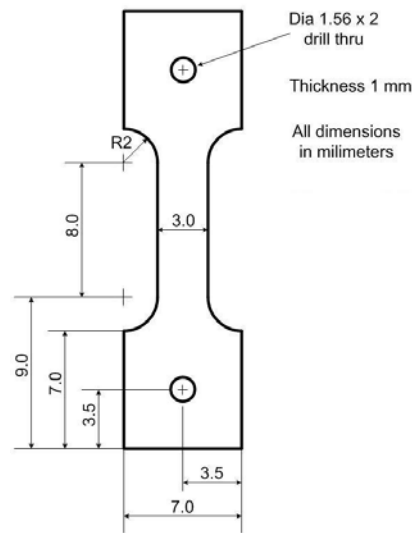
Tensile coupon schematic courtesy of Burak Basaran.
